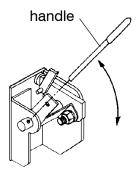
Removable maintenance handle on 225, 260, and 400 amp. E-design switches
